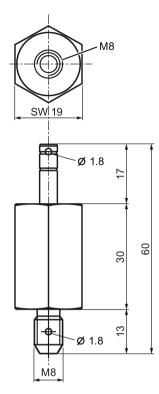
Dimension drawing of quick change holder 6GT2690-0AH00
